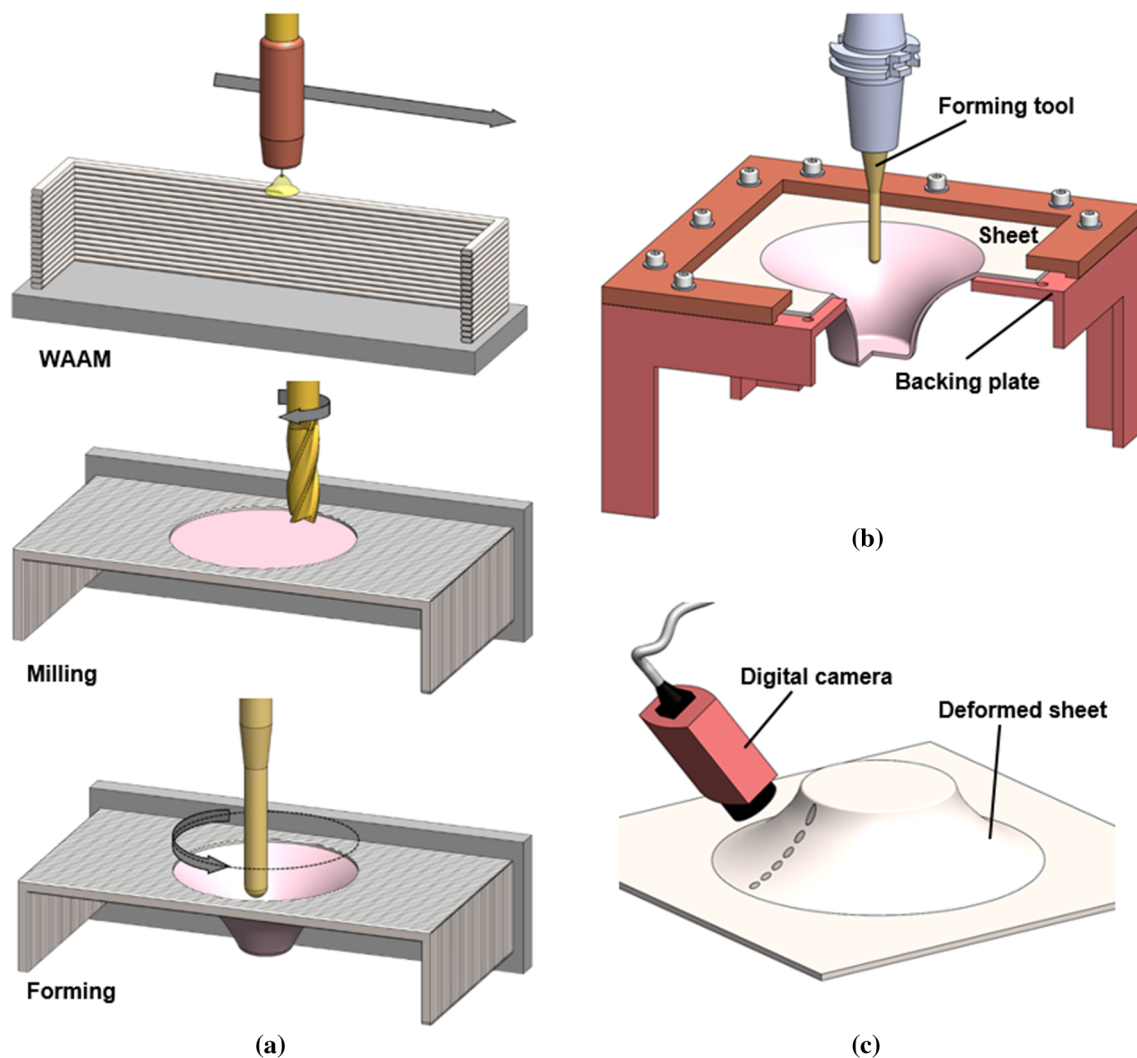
Process route to fabricate a truncated conical shape. a Integration of incremental sheet forming in a hybrid system equipped with additive (WAAM) and subtractive (milling) manufacturing; b Con-
